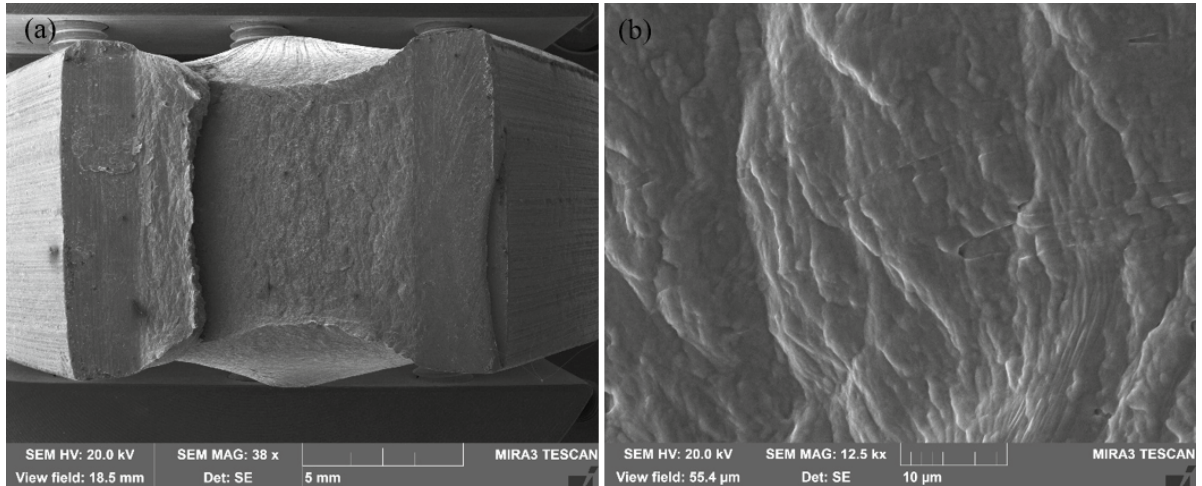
SEM micrograph of the specimen fracture surface after Charpy impact test.
